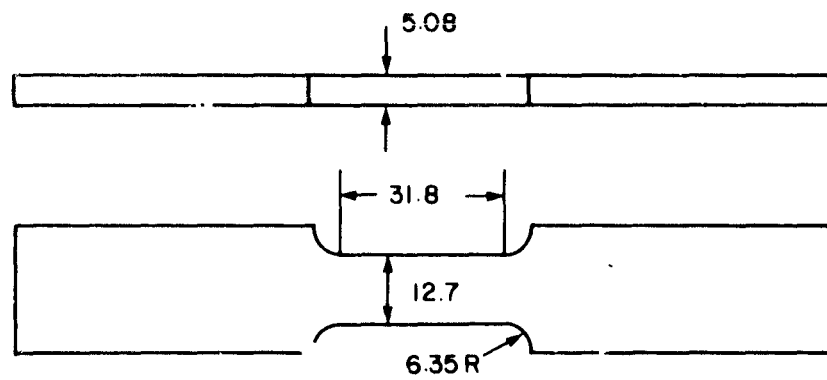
Schematic of tensile test specimen. Dimensions are in mm.
